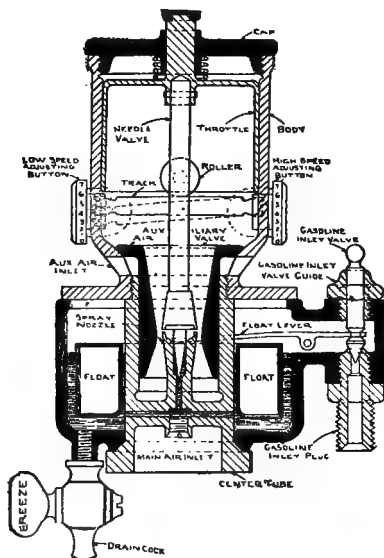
How the Carburetor Vaporizes. Sectional View of Breeze Device Shows Important Parts.
